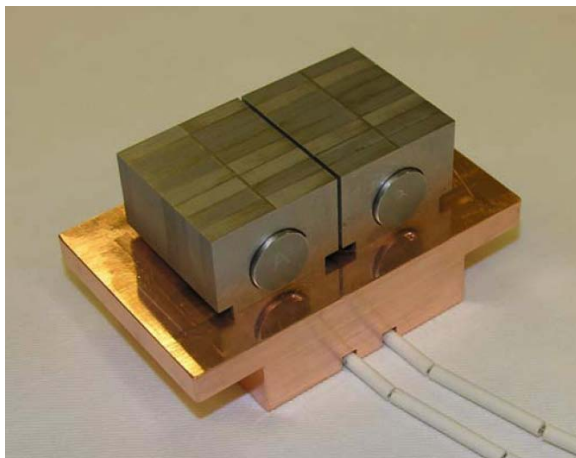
Prototype C-Mod tungsten lamella tile modules mounted on a test fixture for high heat flux testing.
